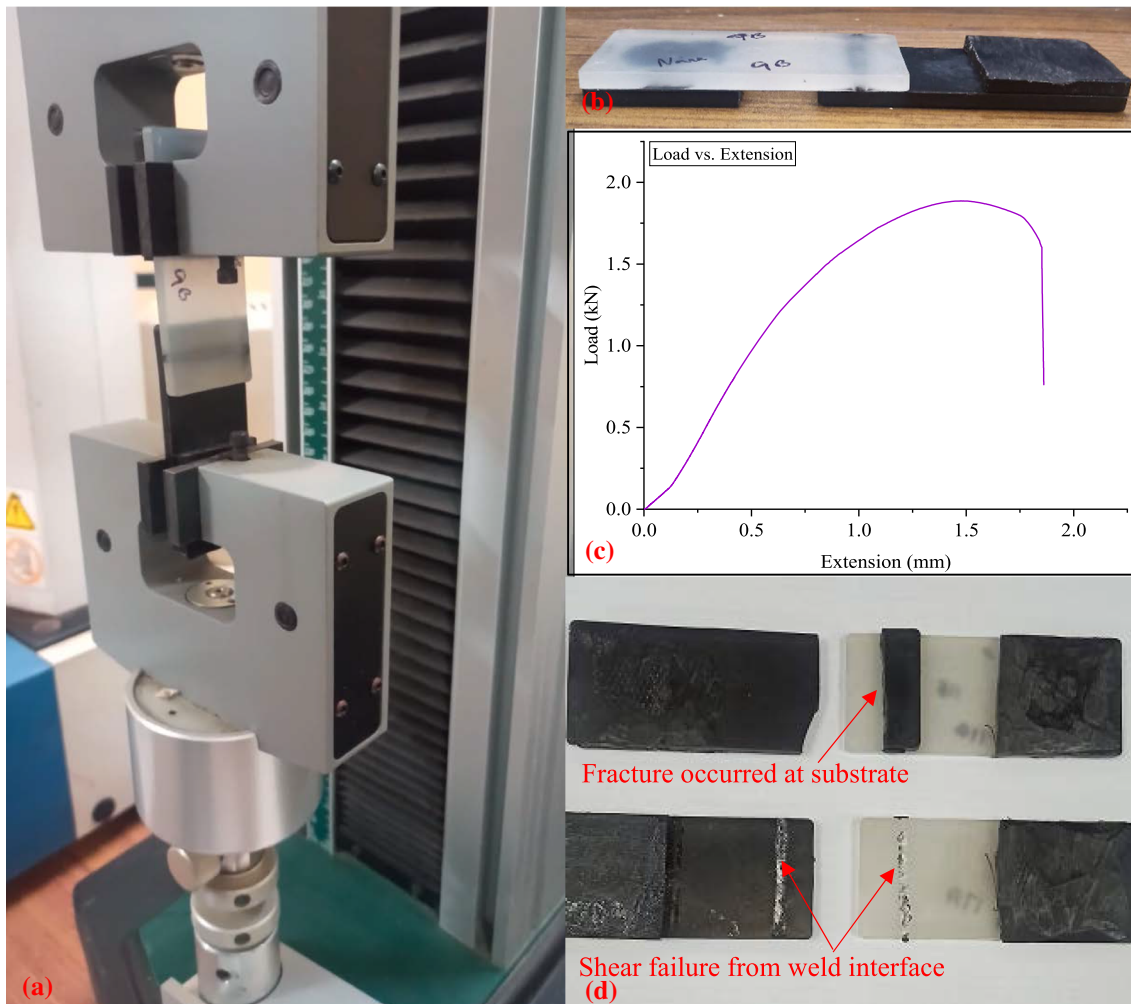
(a) Photograph of the weld strength testing apparatus, (b) prepared specimen for lap-shear tests, (c) load–extension plot of a weld sample during lap-shear tests, and (d) fractured weld samples.
